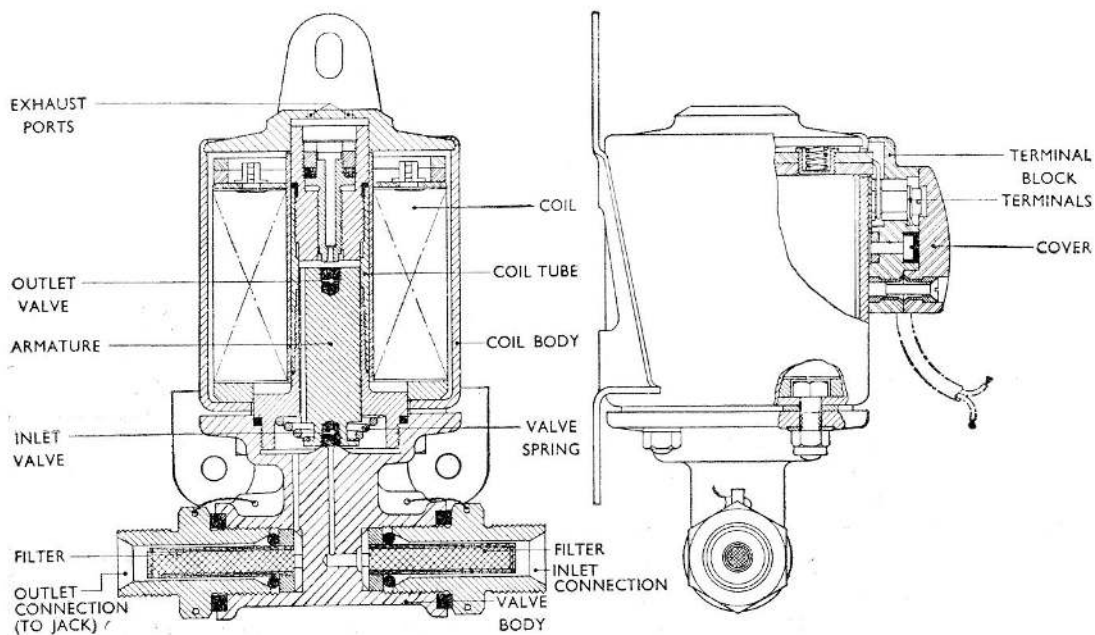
Sectional view of electro-pneumatic valve, Type ES
